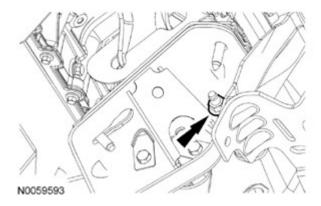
Locating Engine Support Insulator-To-Crossmember Bracket And Nuts Courtesy of FORD MOTOR CO.
